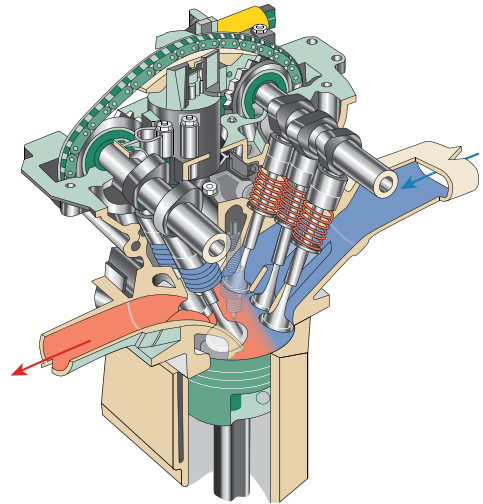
This five-valve per cylinder arrangement has three intake valves and two exhaust valves.
